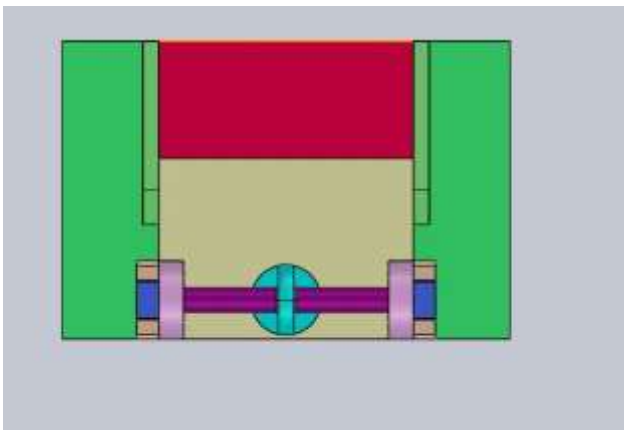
Assembly Top View of Mini Hydraulic press Machine
